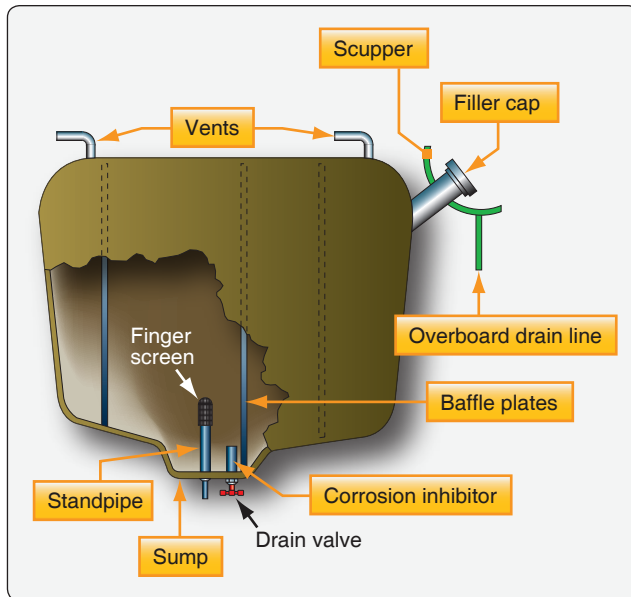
A typical rigid removable aircraft fuel tank and its parts.
